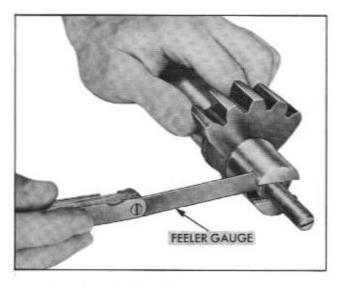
Checking End Play of Lash Adjuster Screw
